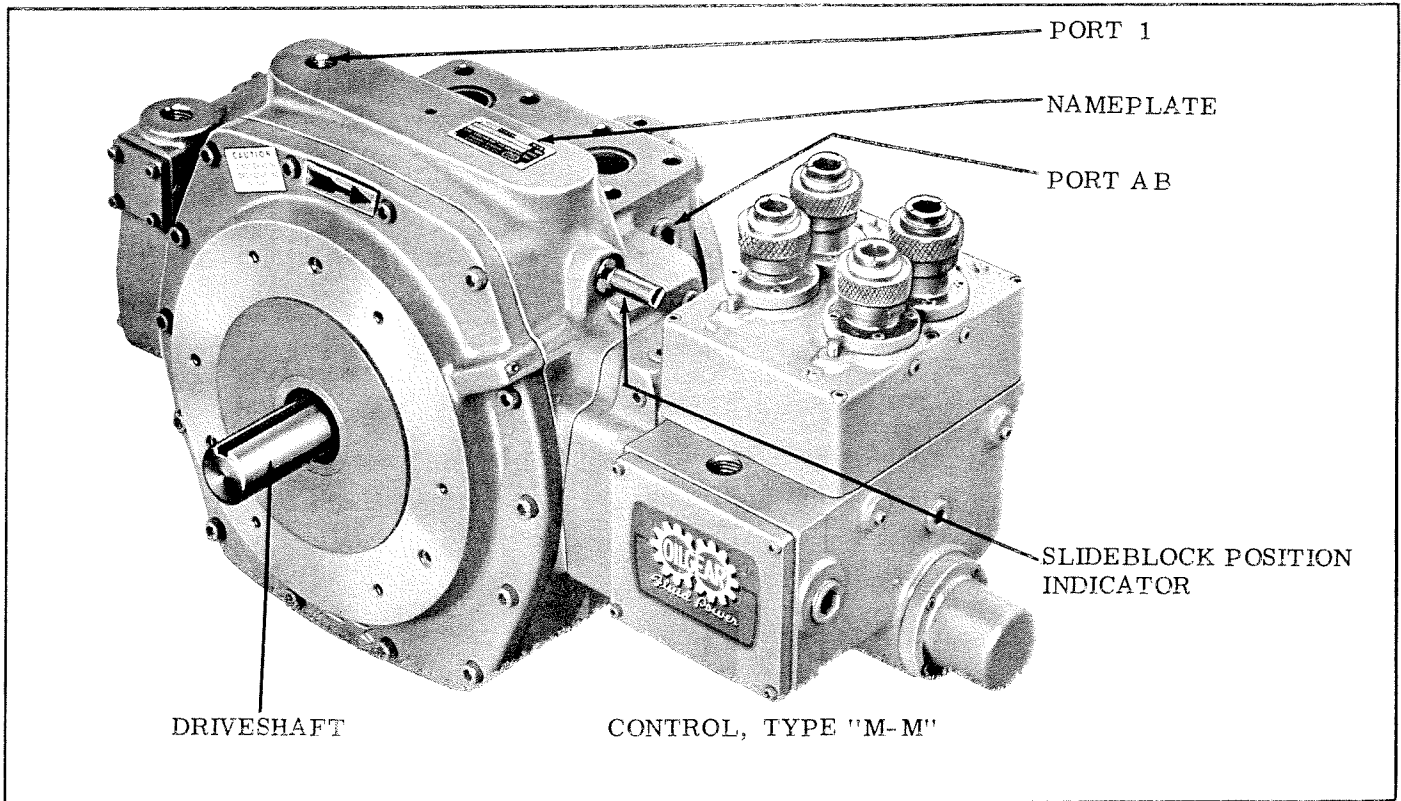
Oilgear Type "PVAKMZ-054-TMZ" Pump with Electric Multi-Position Control (54558).
